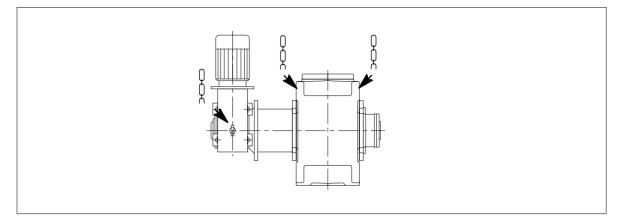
Attachment points on gear-units types B3.H / T3.H with auxiliary drive
